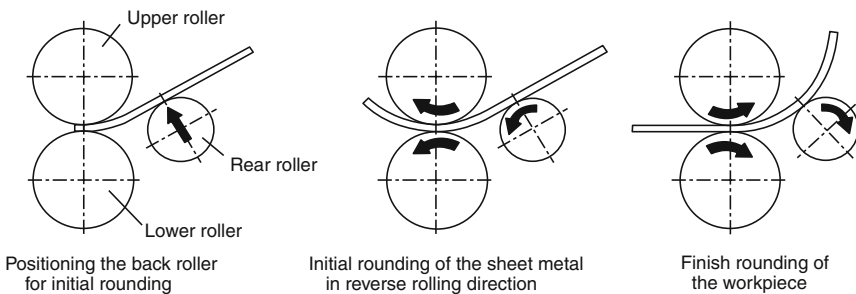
Bending and finish round bending on an asymmetric three-roll round bending machine [ZICK79]
